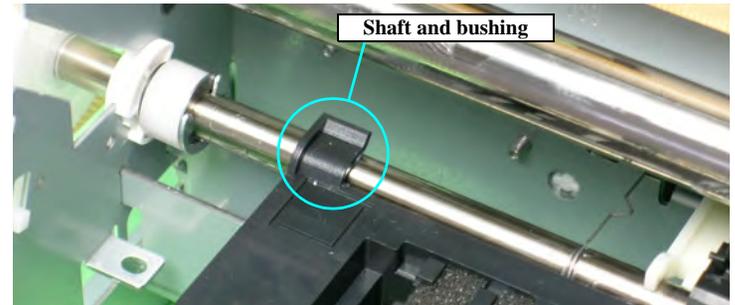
The PF Roller Shaft and the bushing of the Front Paper Guide
